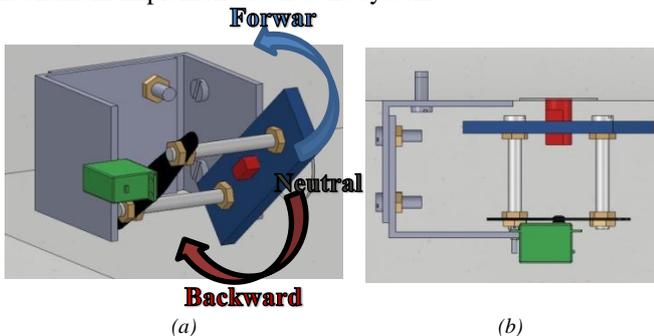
CAD design of Gear System (a) Oblique view (b) Top view
